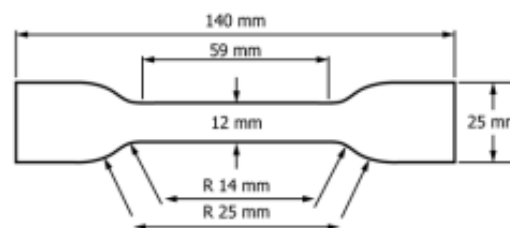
Die for Stamping Tensile Dumbbell Specimens—D412A Die
